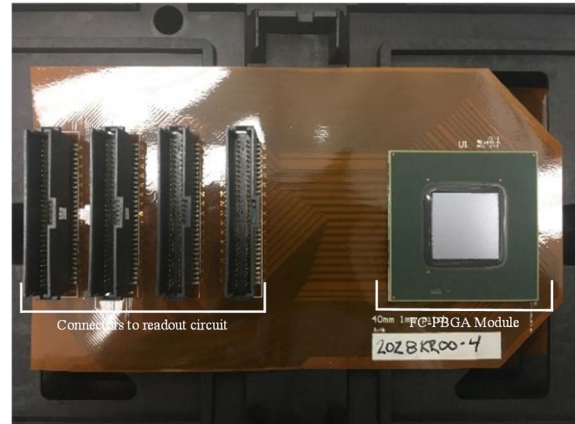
FC-PBGA module (on the right side) without lids assembled by the BGA on flexible PCB with four readout connectors (on the left side).
